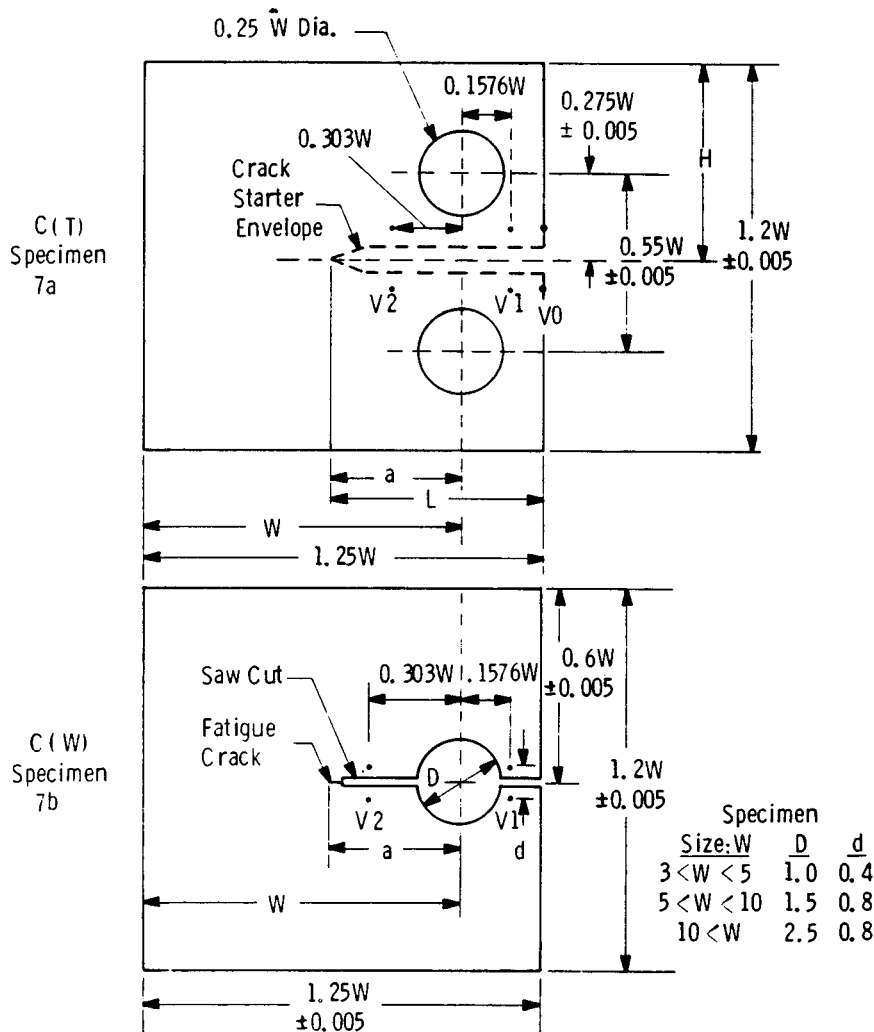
Two Pin Hole Compact Tension and Crack-Line-Wedge-Loaded Compact Specimens
